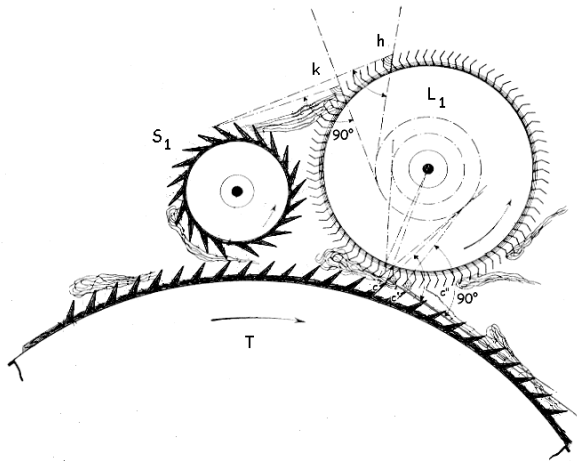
The drum-worker – stripper assembly on the 2nd drum
